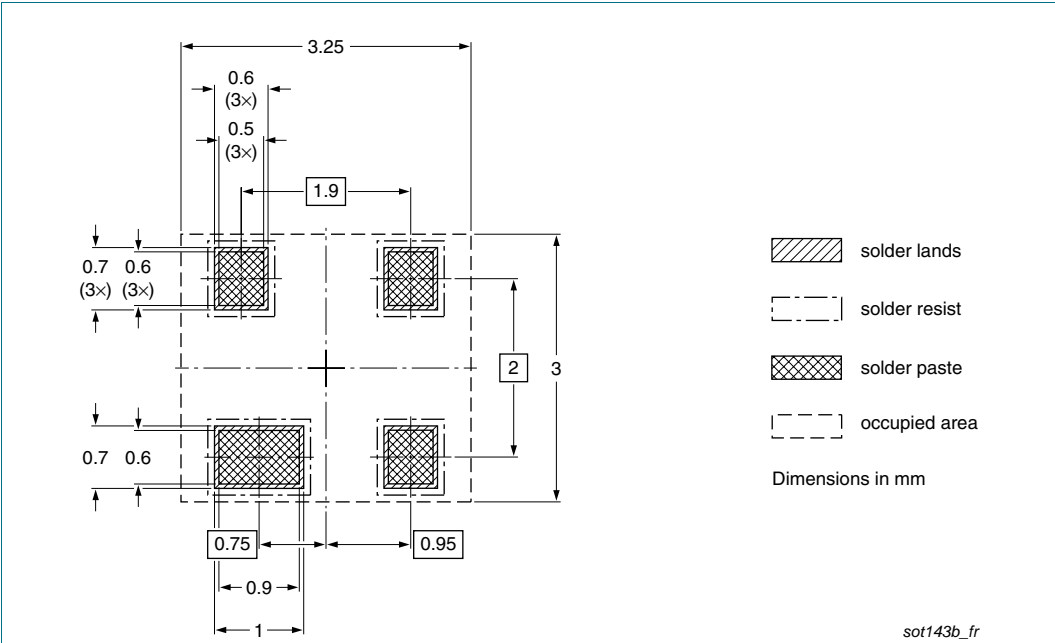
Reflow soldering footprint BAS28 (SOT143B)
